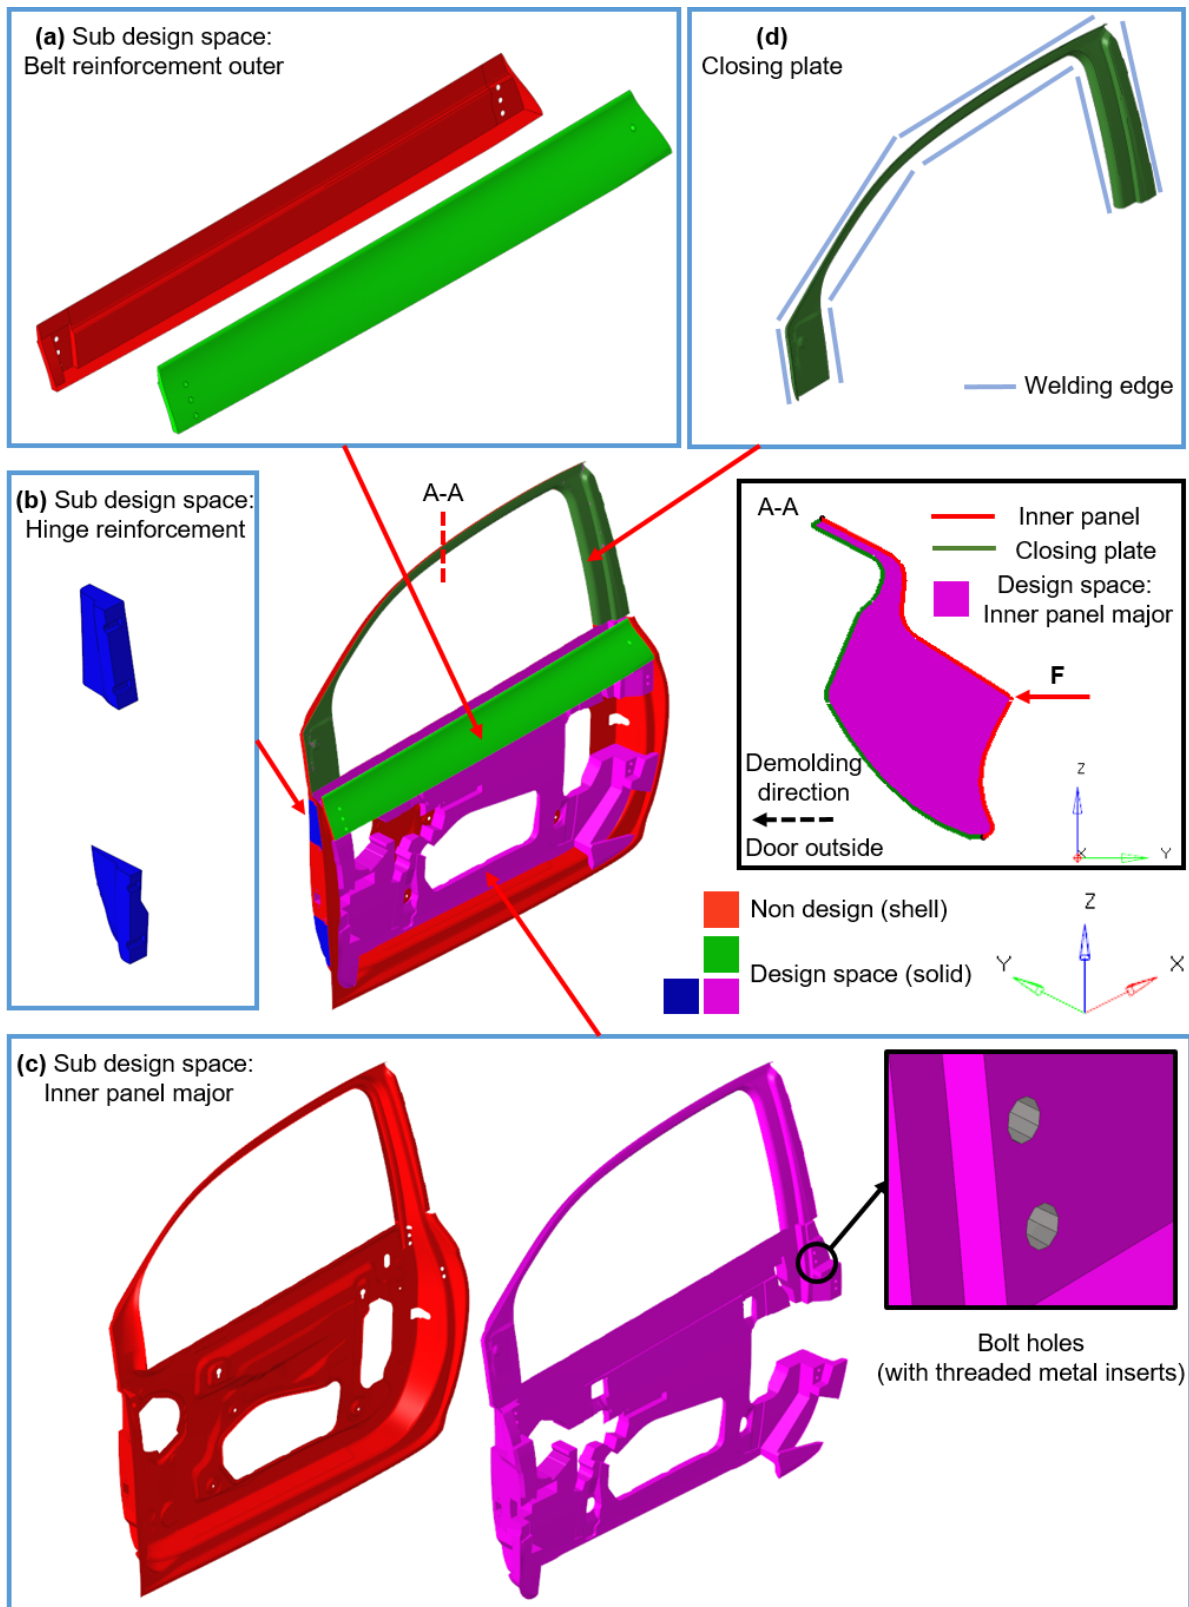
Concept 2: sub-design spaces and joining techniques
